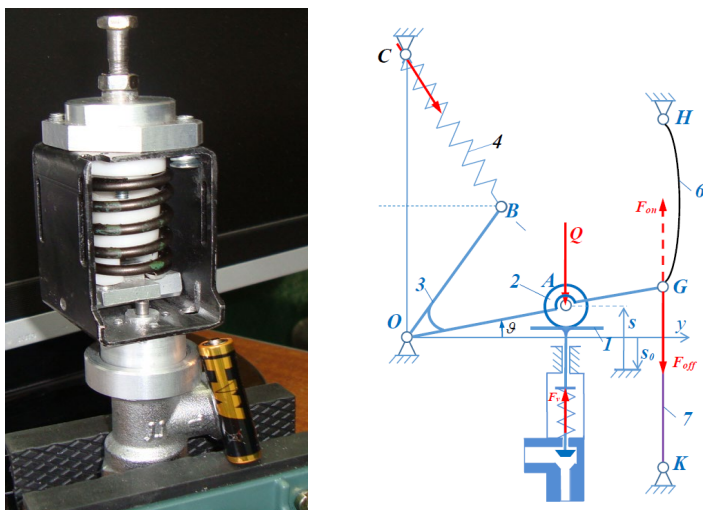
First prototype of a bistable valve control mechanism driven by a SMA: a) Photograph; b) Kinematic diagram.
